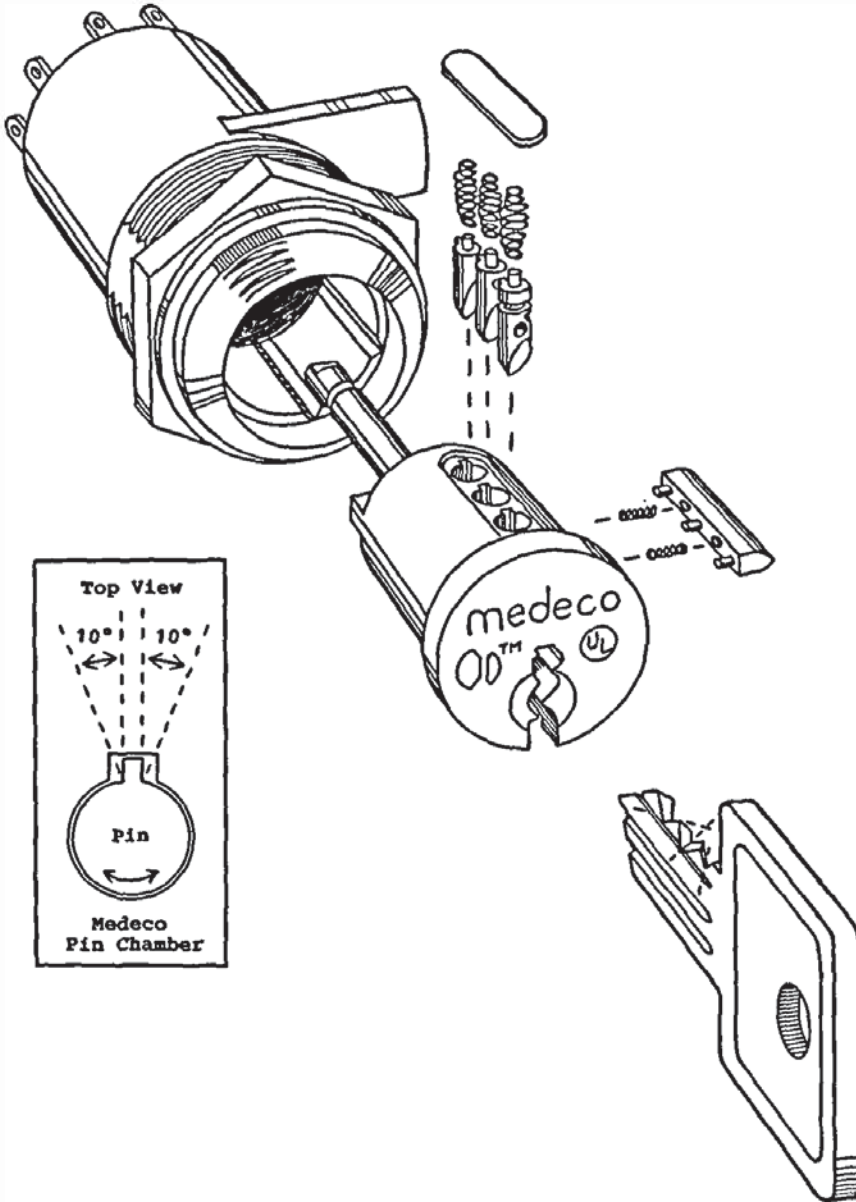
C. Tougher than it looks: an exploded view of the Medeco three-pin tumbler, combination switch/cam lock.
